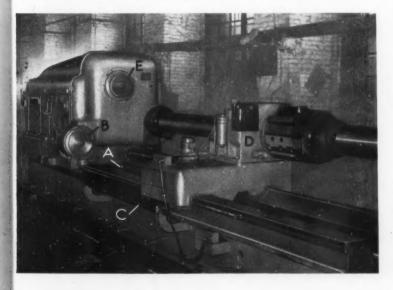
This Special Boring Unit is One of Three to be Incorporated in an Installation for Machining Electric Motor Frames. The Boring Bar has Provision for Feeding the Cutting Tool Radially
